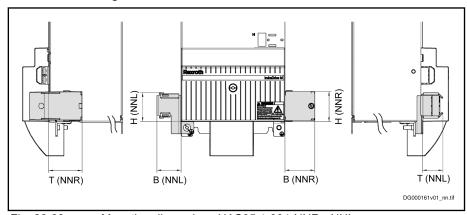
Mounting dimensions HAS05.1-004-NNR, -NNL
